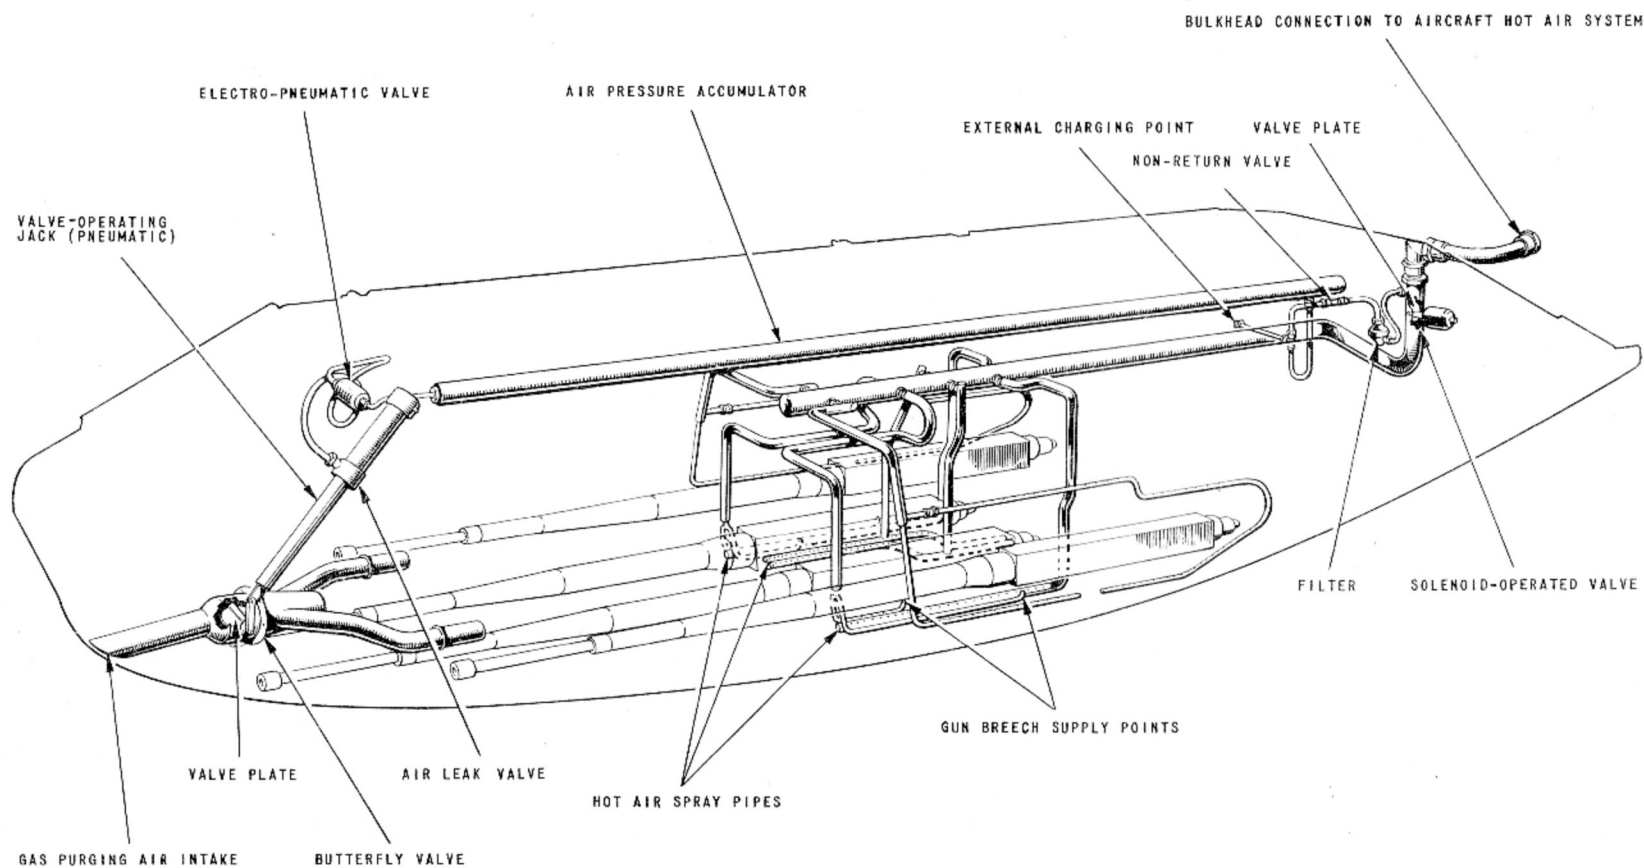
GUN PACK HEATING AND GAS PURGING SYSTEMS
